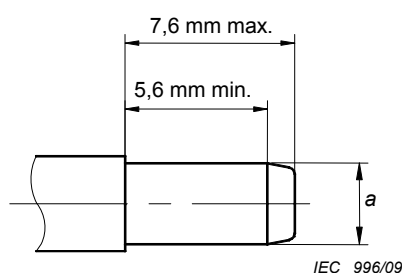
Gauge pin for socket contact (for dimensions, see Table 4)
